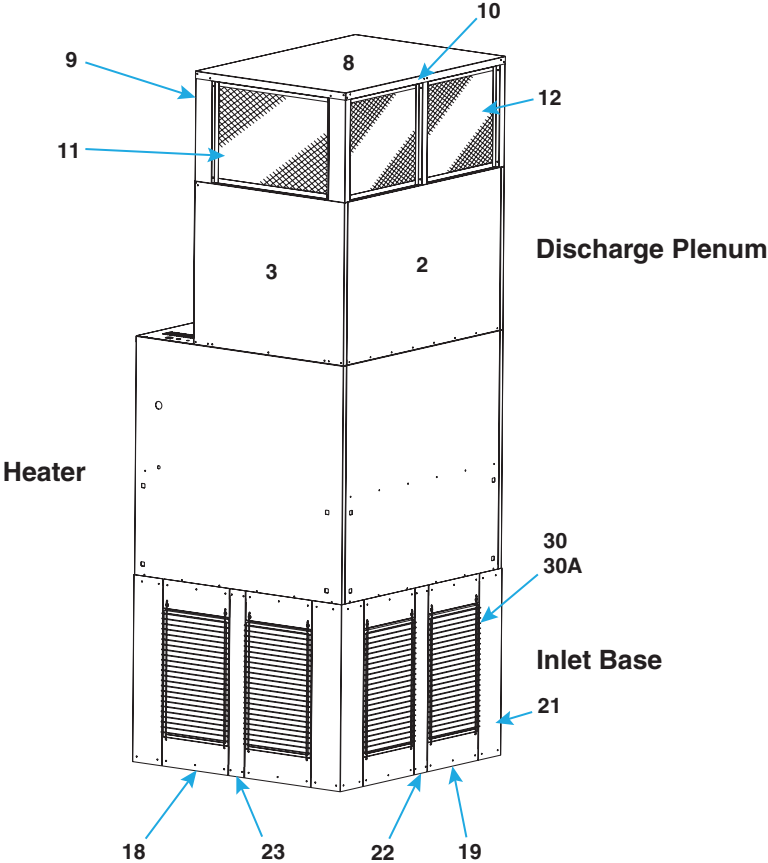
Discharge Plenum and Inlet Base Assembly (Refer to [Table 31](#) and [Table 32](#))
